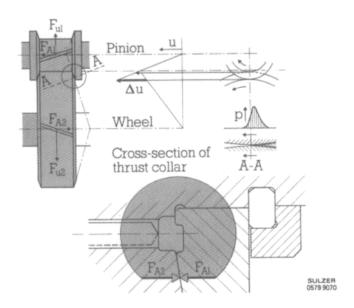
Method of axial thrust transfer in a single helical gear with thrust collar.
